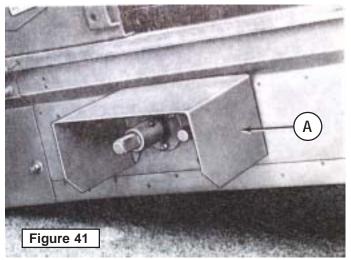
Attach PTO shield "A" to bolts found in flangettes. Note: This shield is used for PTO drive elevator only, regardless to which side it is to be driven from.
